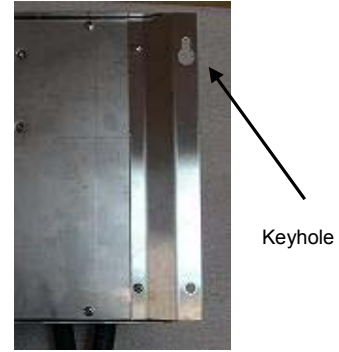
Peridoser Case Mounting Brackets in Mounting Location.
